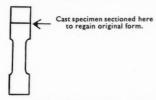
Method of reducing porosity in specimens in sprueing.
